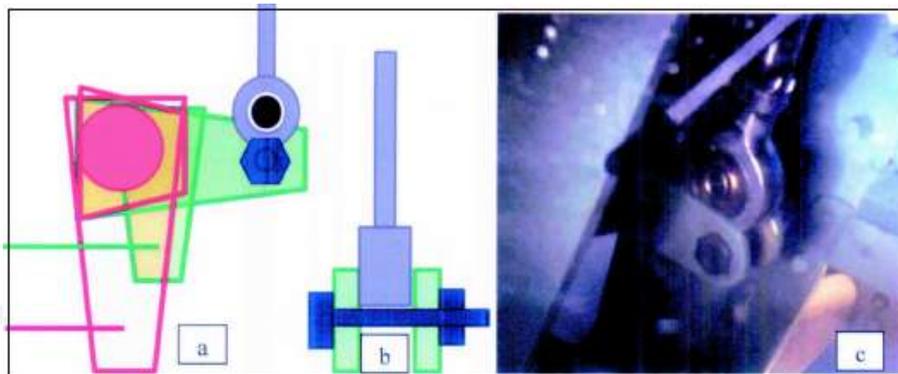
Simulation of the RH roll ball-type flexible control positioned on top the bolt. a) schematic lateral view; b) schematic frontal view; c) in-perspective view of the components.
